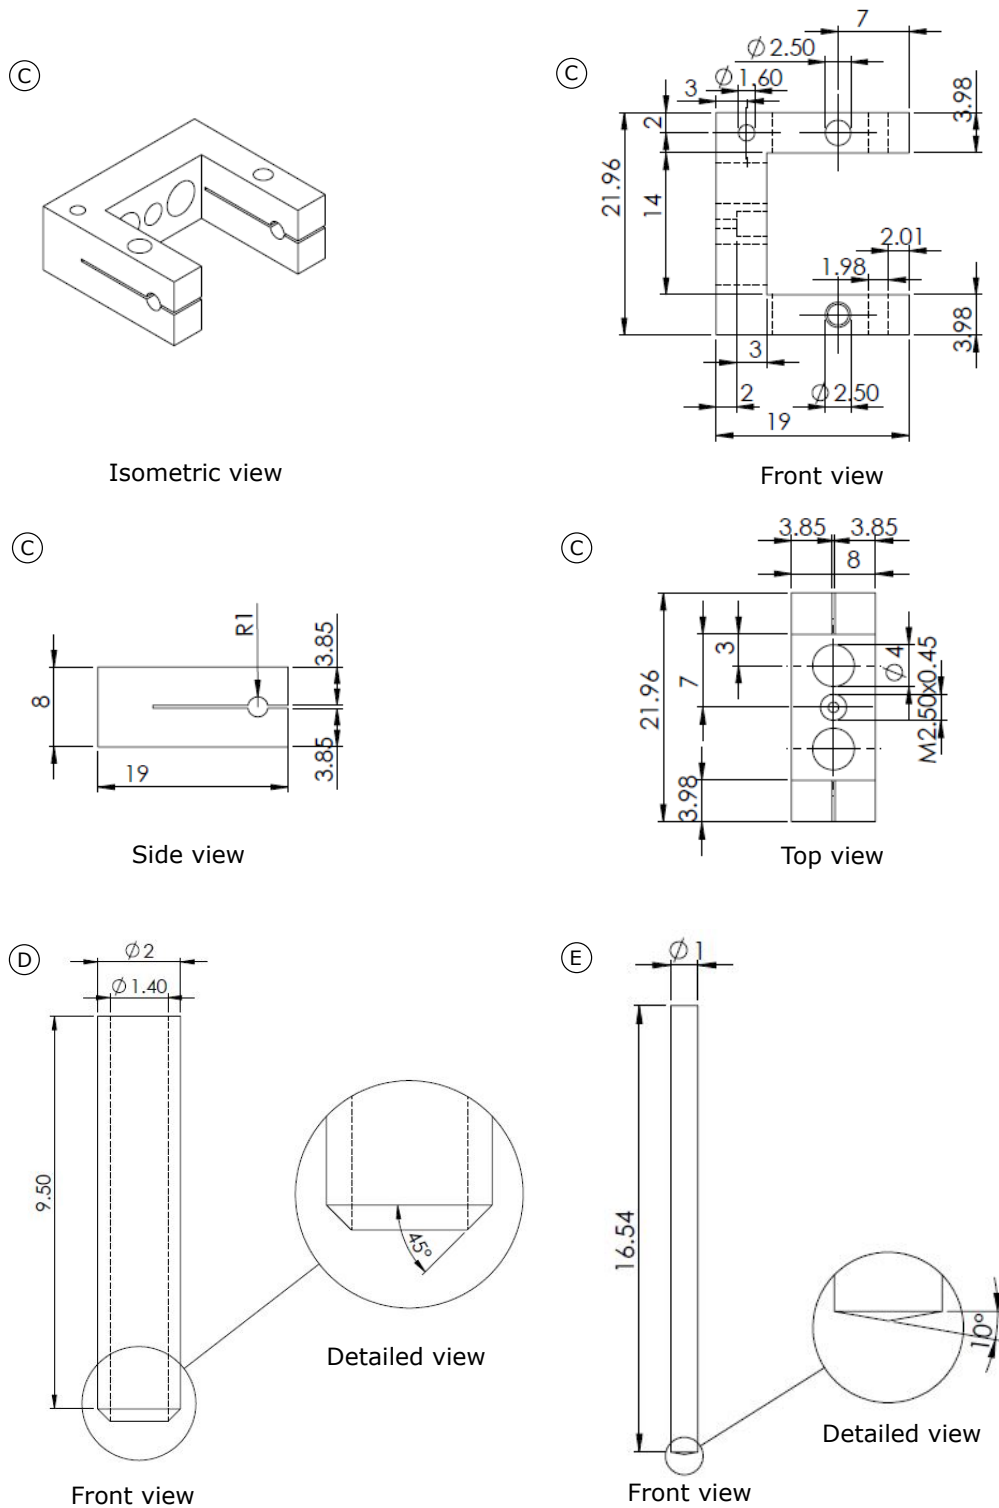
Dimensional details the parts C, D and E of the ion trap. All the dimensions of length are in units of millimeter and the angular dimensions are in units of degree.
